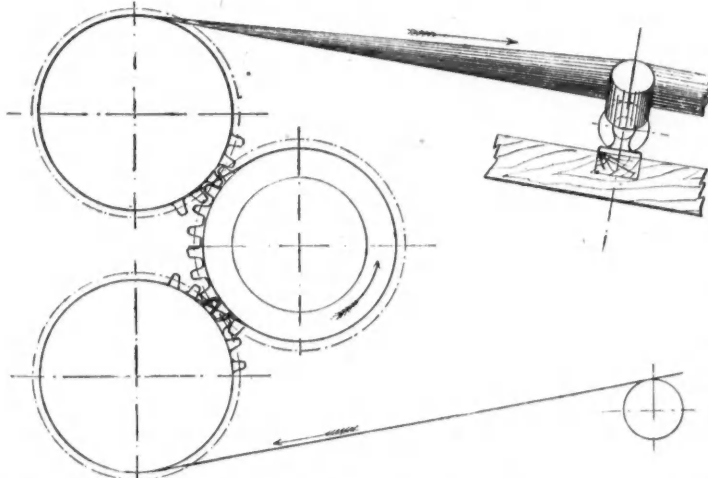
METHOD OF DRIVING LONG CONVEYORS FROM THE RECEIVING END
